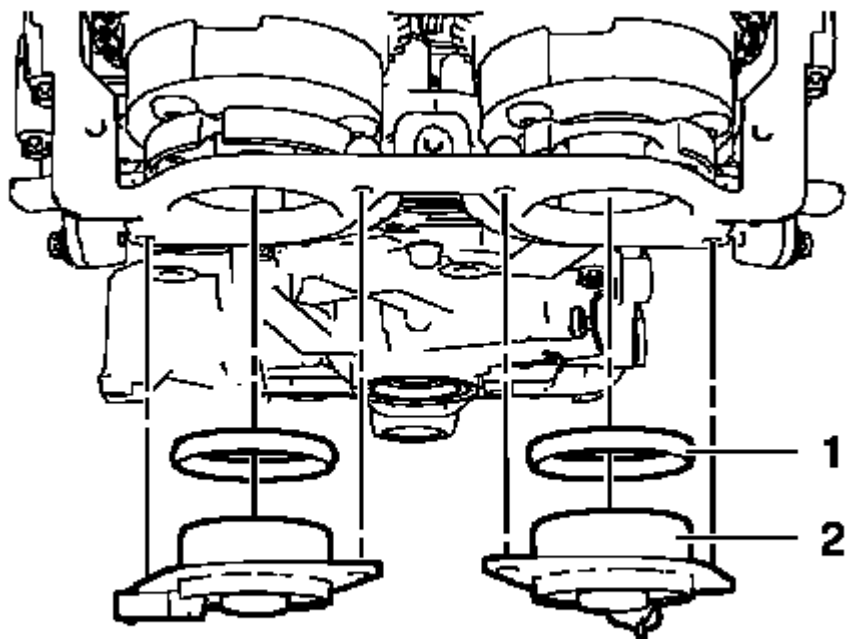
Camshaft Position Actuator Solenoid Valves And Seal Rings
